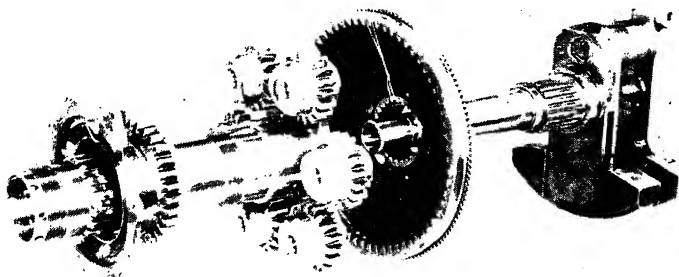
Arrangement of the Wright Cyclone type of planetary reduction gear.
